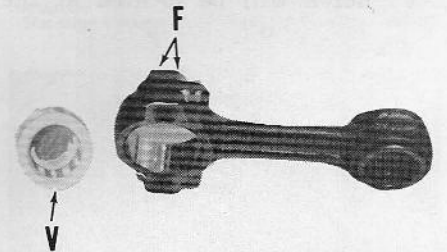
Machined side of connecting rod and cap is shown at (F). Parting surface (V) on bearing cage should form a "V" at one point when correctly assembled.
